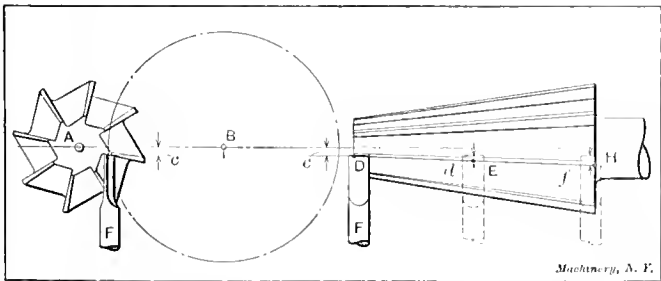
Illustration showing Conditions when Grinding a Taper Reamer by Method shown in Fig. 1
